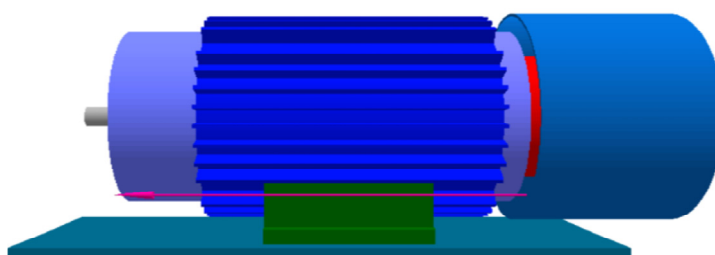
Motor (fan-cooled) drawn using Motor-CAD software (according to specifications of the chosen motor).
